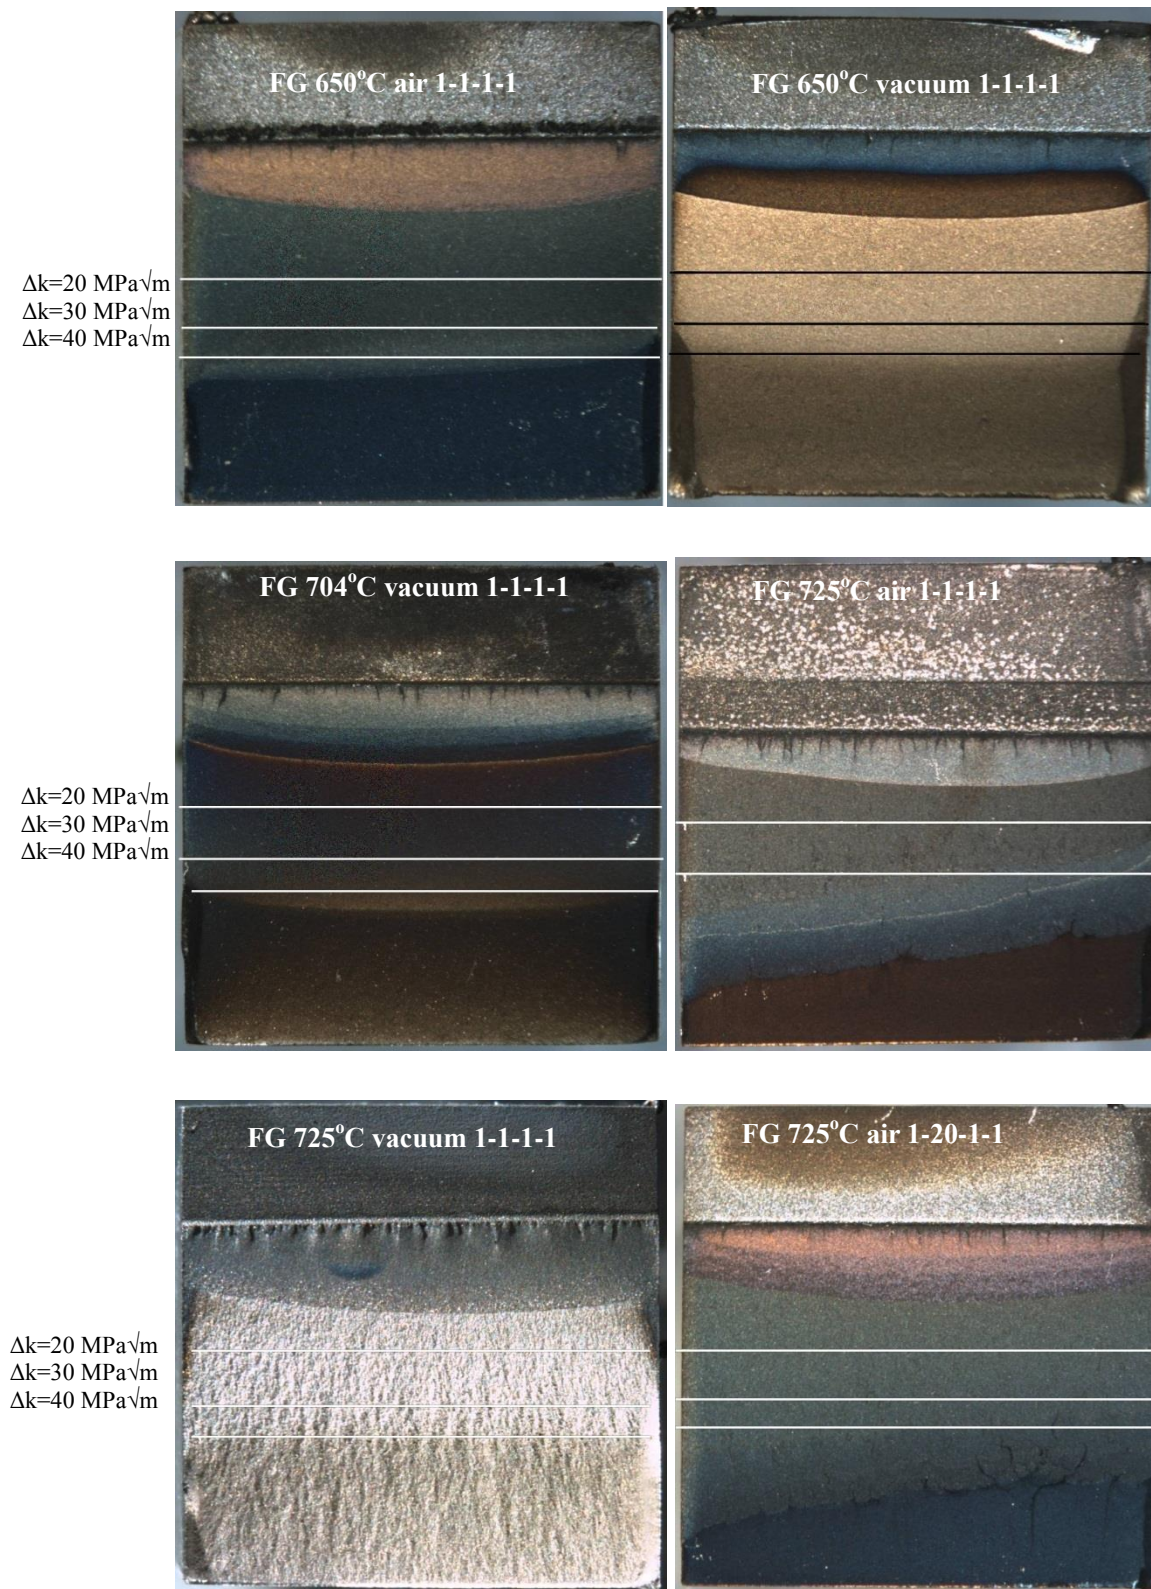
11 Optical overview of fracture surfaces of the FG LSHR alloy.
